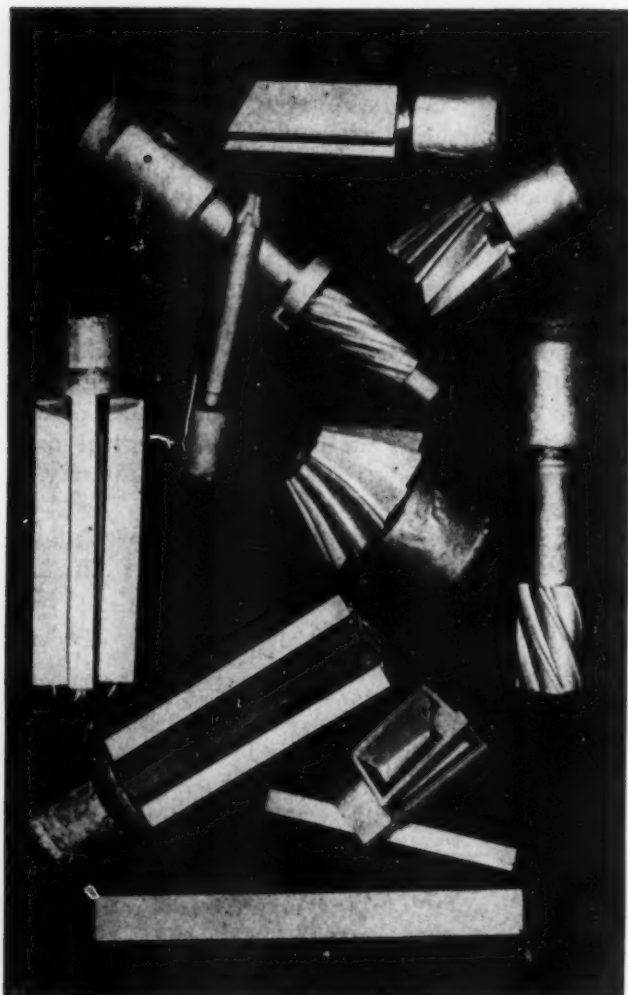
Various Cutting Tools Manufactured by Lost-Wax Method of Molding and Casting
